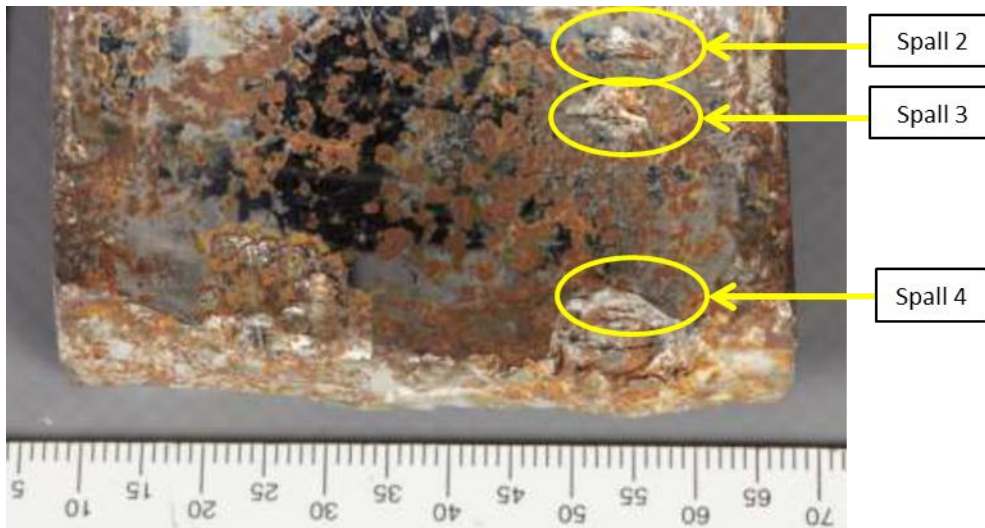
The fatigued surface as received at QinetiQ before cleaning. Along a line approximately 14 mm from the upper surface of the gear (right hand edge in photograph) some holes or spalls are observed, with the largest (named spall 4) located at the edge of the through-thickness fracture. Photo: AIBN/QinetiQ
